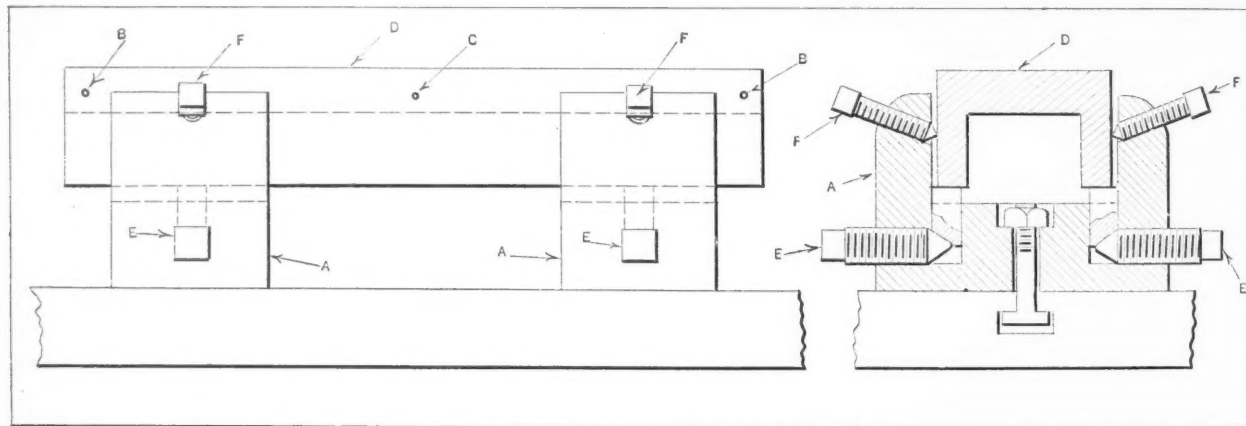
Fixtures Used in Planing Faces of Driving-box Shoes and Wedges
